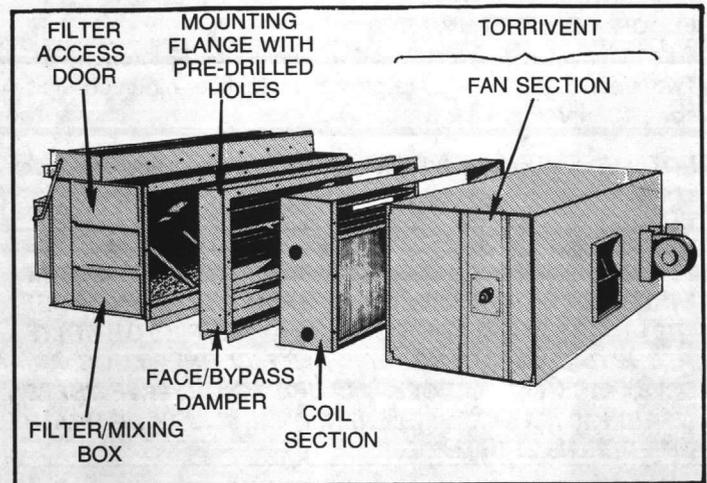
Exploded View of a Horizontal Floor Unit and Accessories
